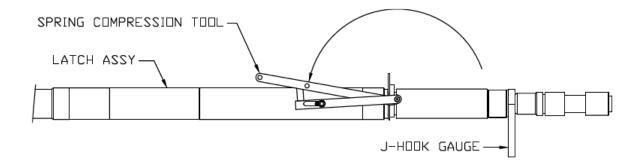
LATCH PISTON SPRING COMPRESSION
